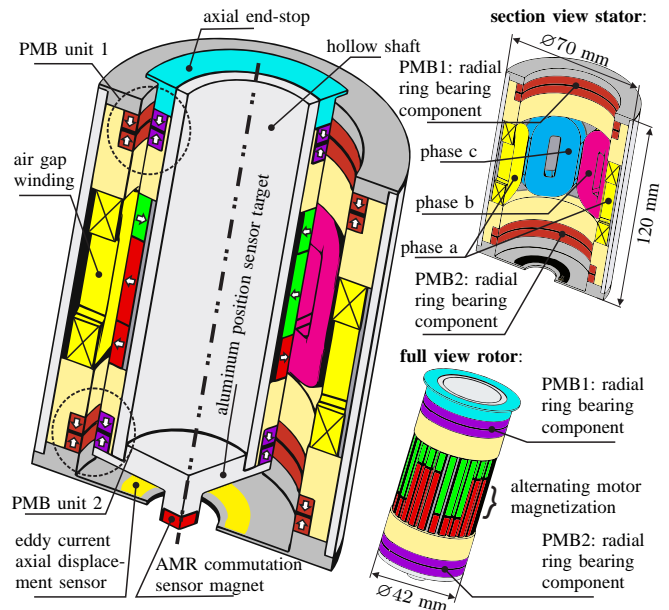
Schematic view of the Bearingless Rotating Field Axial-Force/Torque Motor in its operating position. The passive magnetic radial bearing (PMB) units are axially aligned. Inside rotor motor design with $p_r = 4$ segmented rotor pole pairs and $m = 6$ air-core coils.
